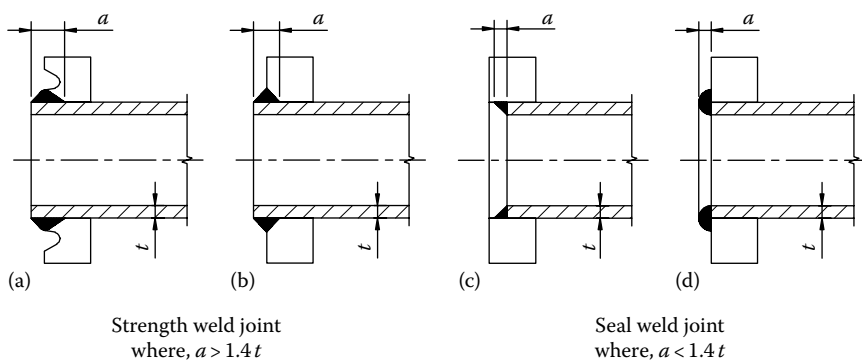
Some acceptable weld geometries as per ASME Code Section VIII, Div. 1. (a and b) Strength weld joints and (c and d) seal weld joints.
